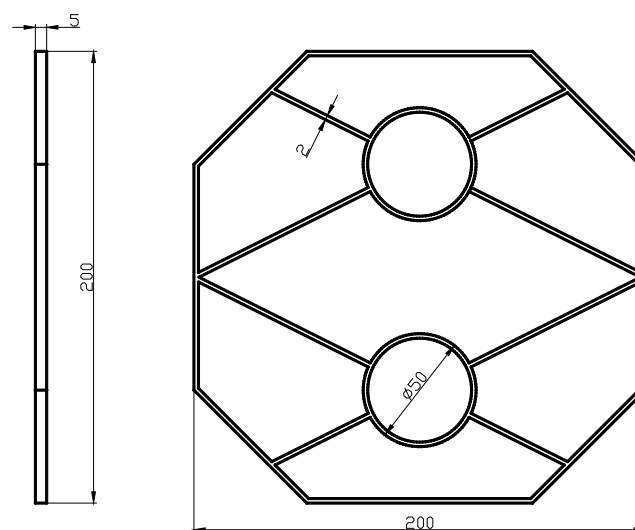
2D drawing with dimensions of real-world case study 1
